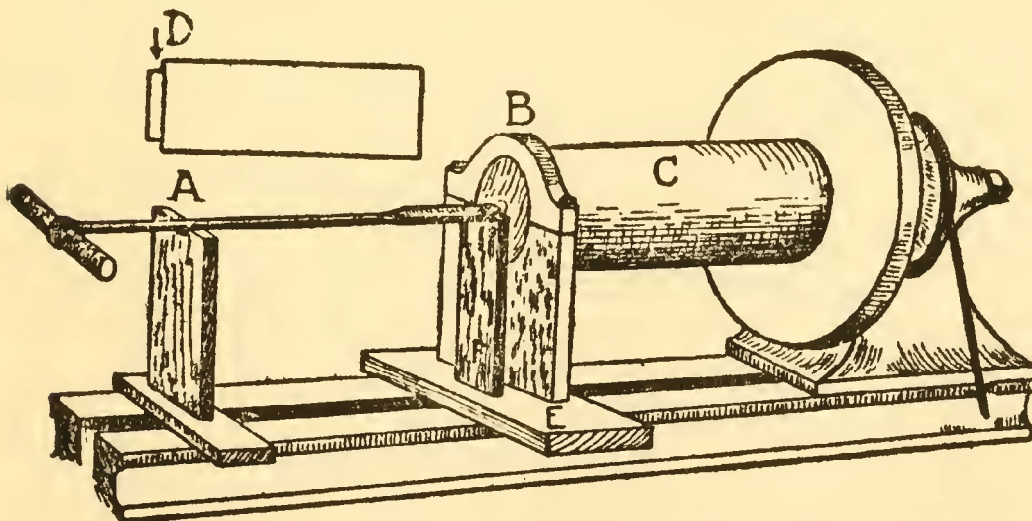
DEEP BORING A ROLLER WITH SPOON AUGER.
